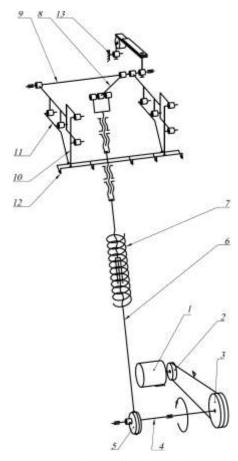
Block diagram of the mechanism of oscillating movement of the guide needles with an elastic con-rod of the warp knitting machine
